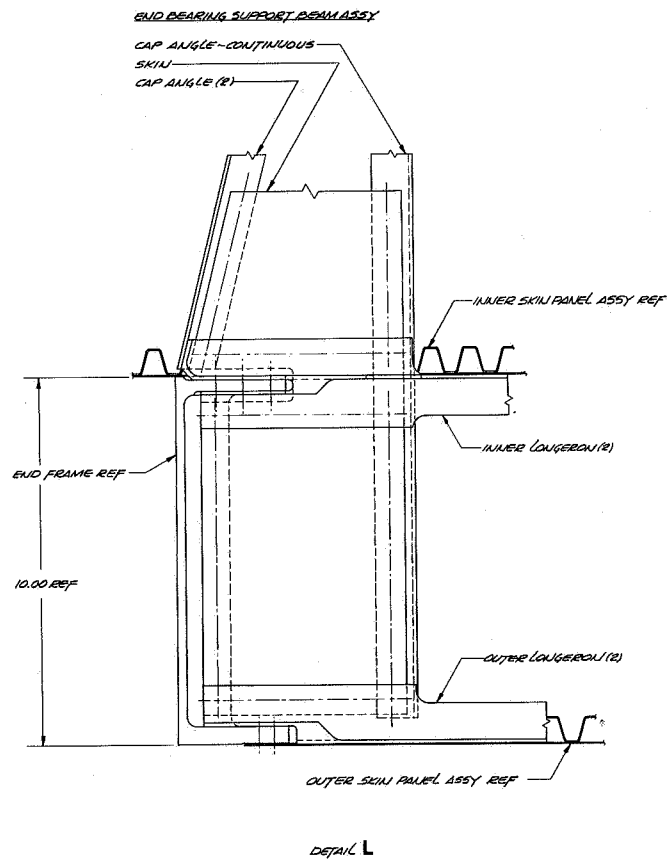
Main Rotational Frame and Arm/Counterweight Drive Structural Assembly.
